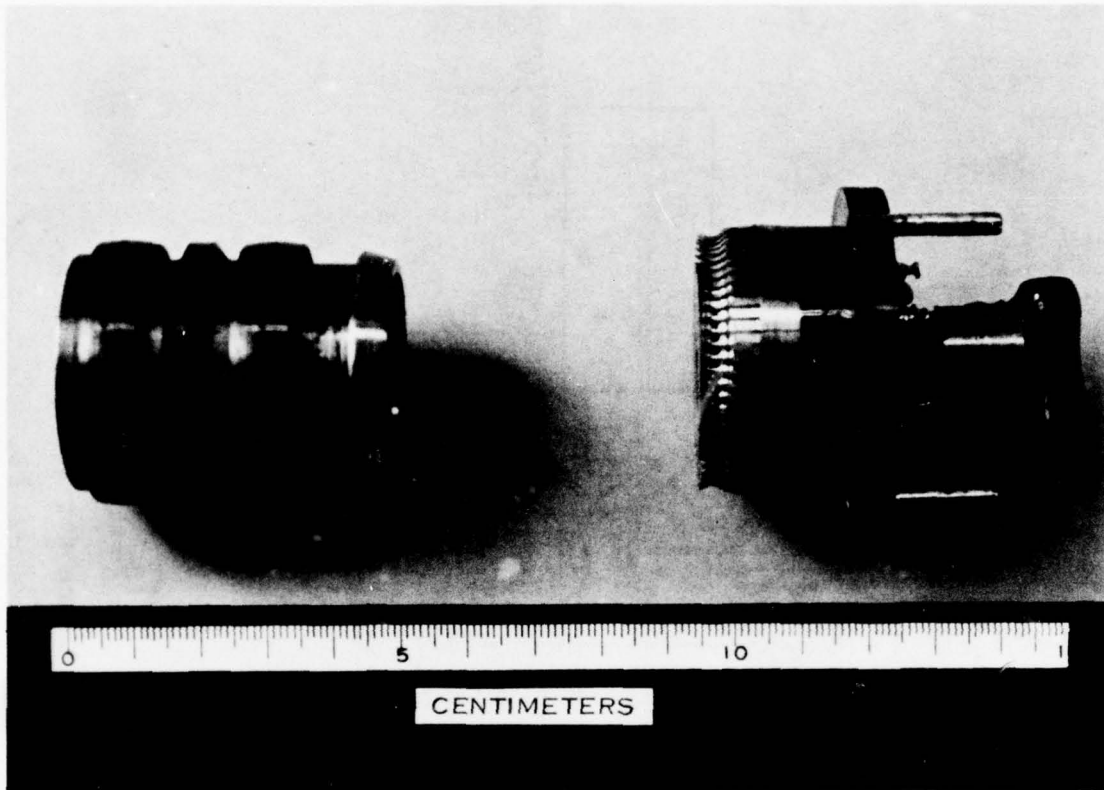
Photograph of EDS inertial slug with latching mechanism.
